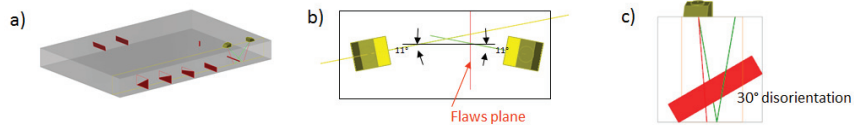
(a) A planar component containing disoriented backwall breaking flaws and a 2 mm diameter SDH; the TOFD configuration with the 11° probes’ skew; (b) top view and (c) side view showing the flaw used for simulating the top edge of the 30° disoriented notch.
